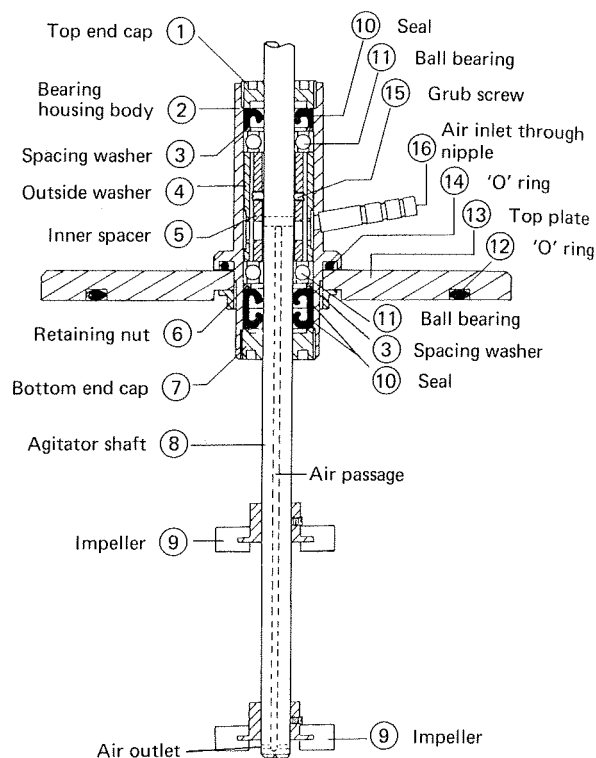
Diagram of bearing housing with combined agitator-sparger (Inceltech L.H. Reading, England).
